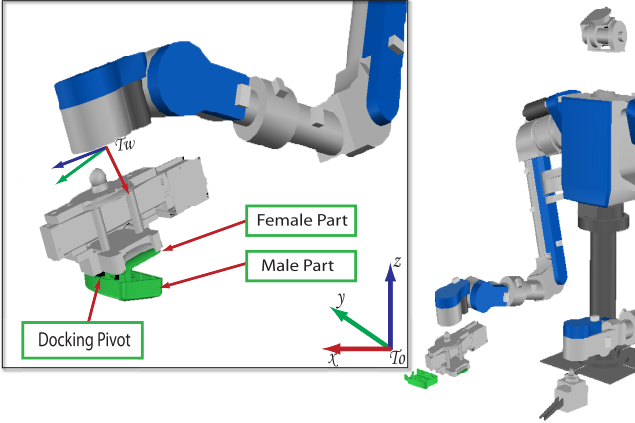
Experimental Setup - The HIRO robot performs assembles a camera mold consisting of a female part and a 4-snap male part.
